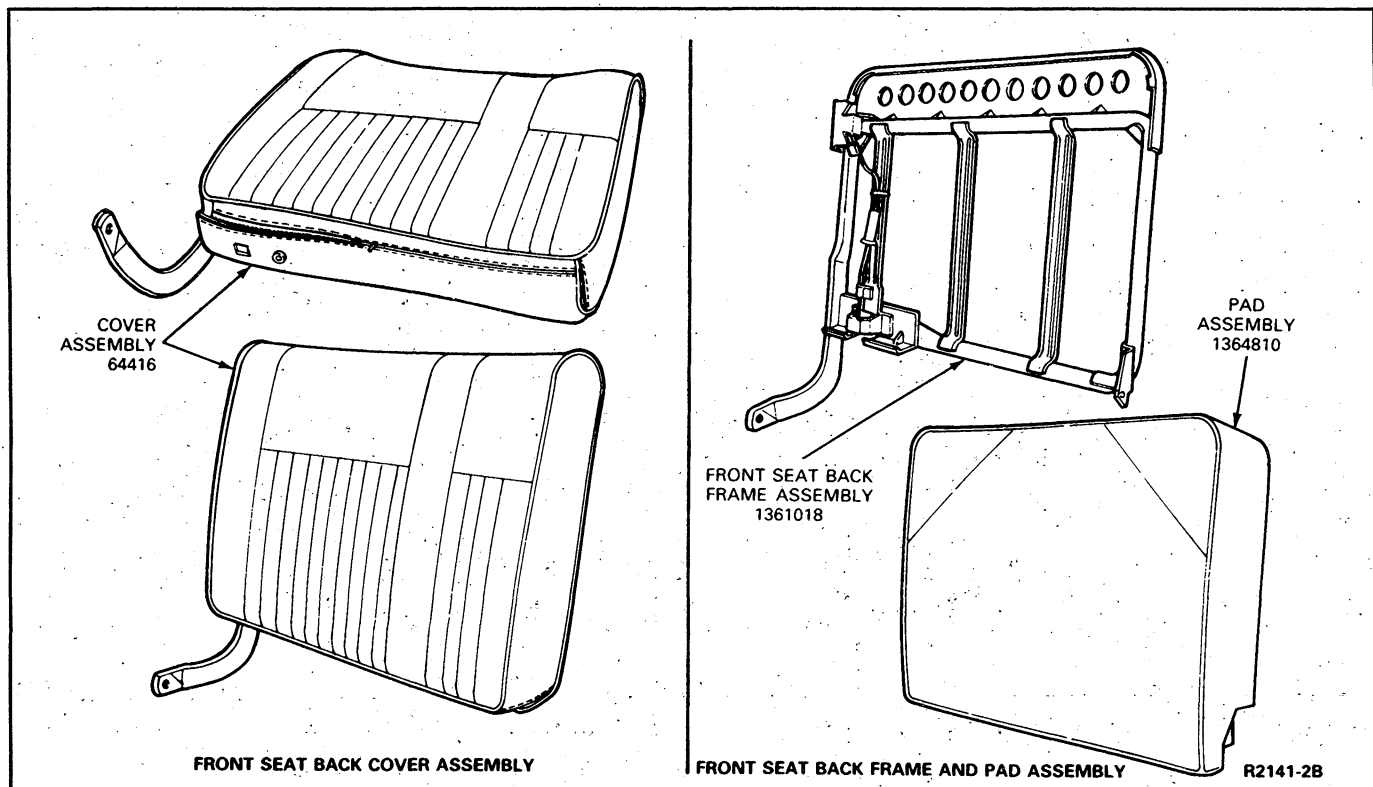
Front Seat Back Frame, Pad and Cover—F-150—F350, Super Cab and Bronco
